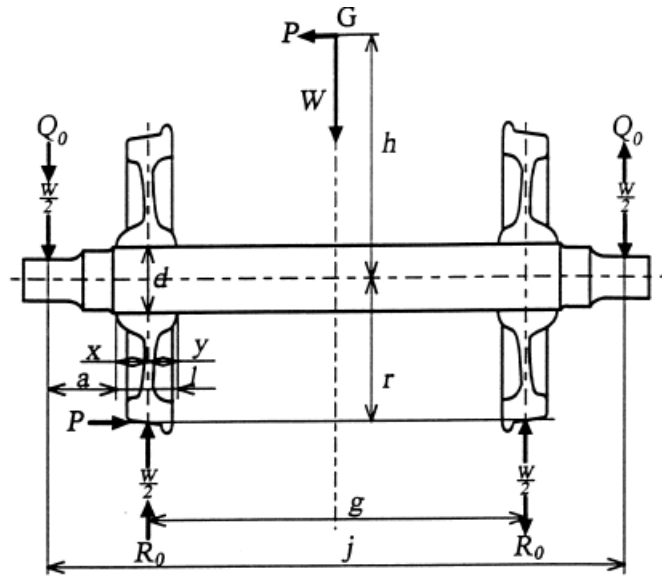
Forces acting on a wheel-axle assembly [11].
